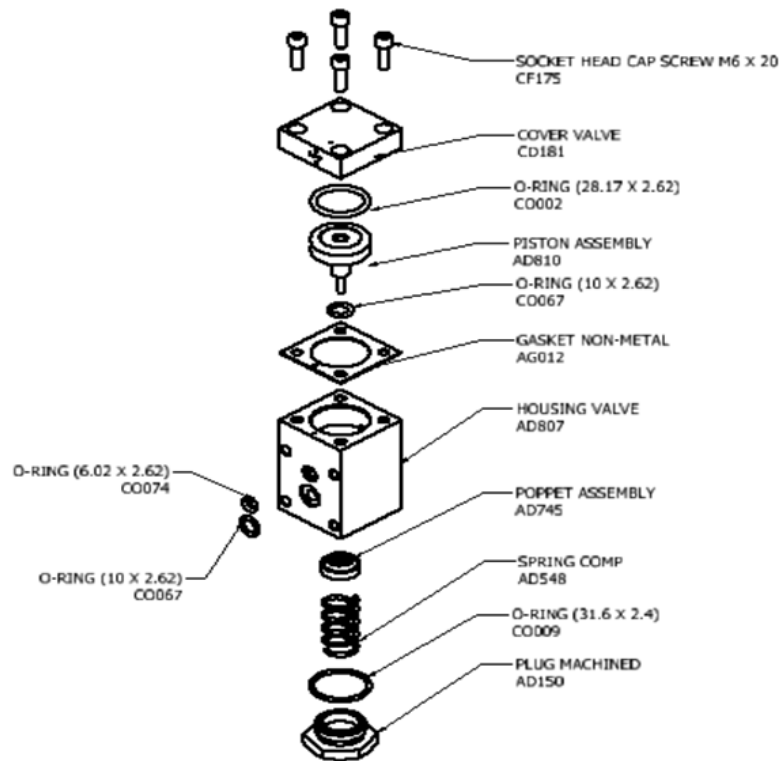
Exploded view of exhaust valve of Dryspell Plus model 10
